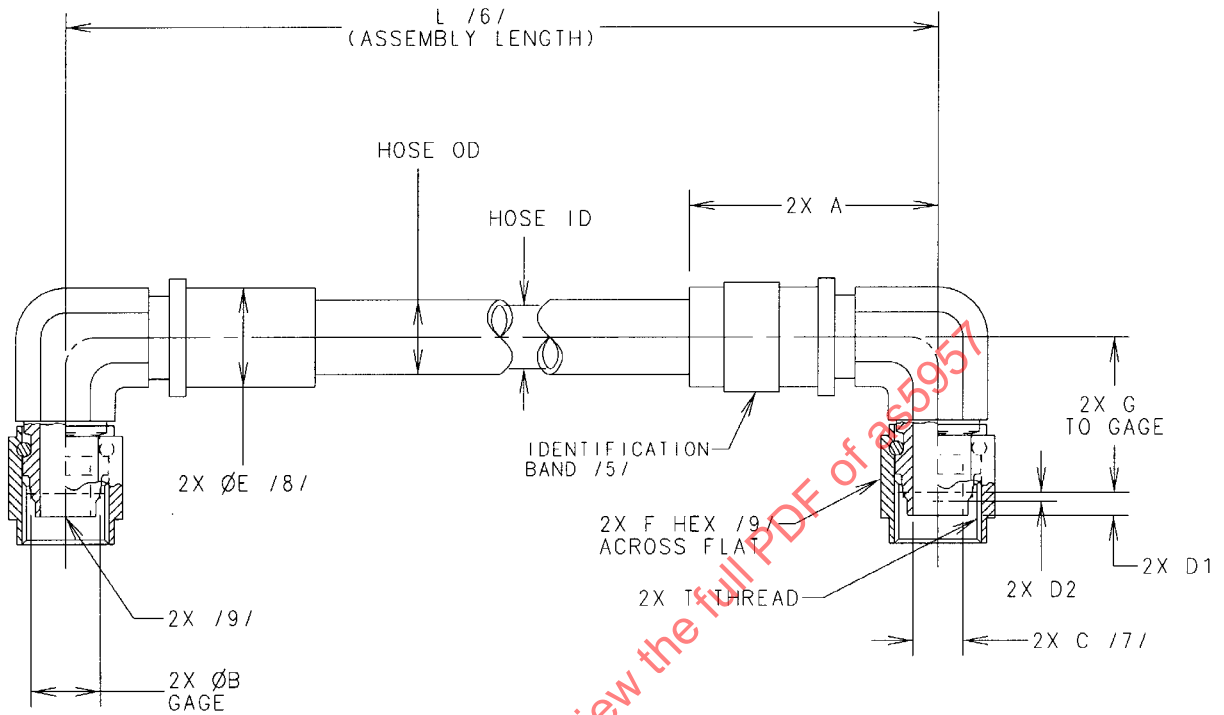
FLARELESS HOSE ASSEMBLY, 90° TO 90° ELBOW
